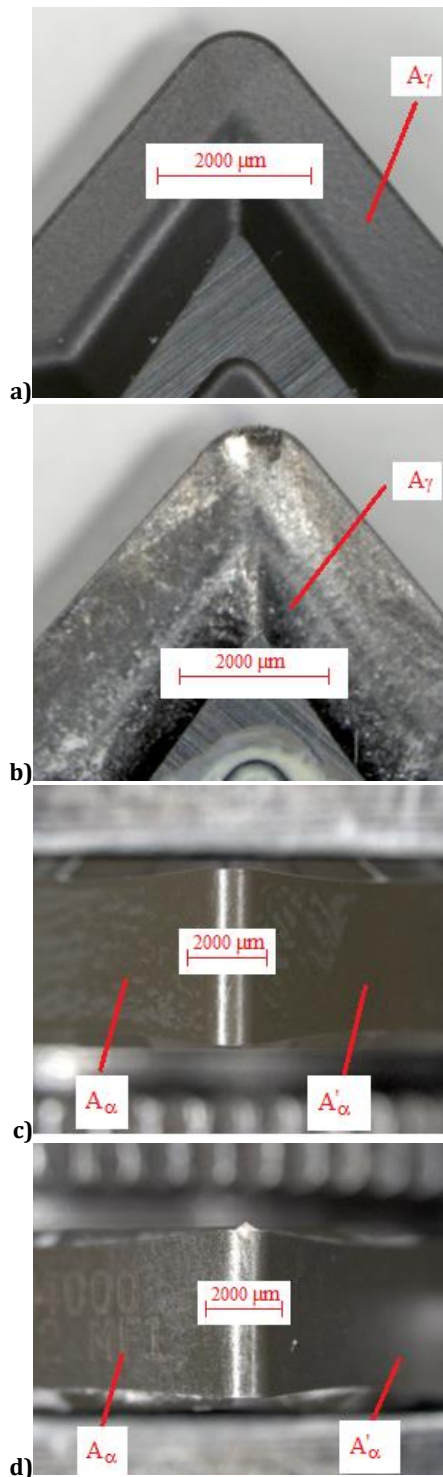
Cutting insert SECO CNMG 120408-MF1 TM4000: a) and c) before turning, b) and d) after turning
